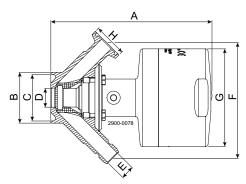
Pneumatic with valve body: Collared pipe welding
